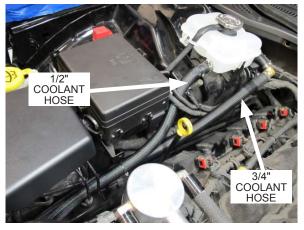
y: Install coolant hose assembly and route towards electric water pump
